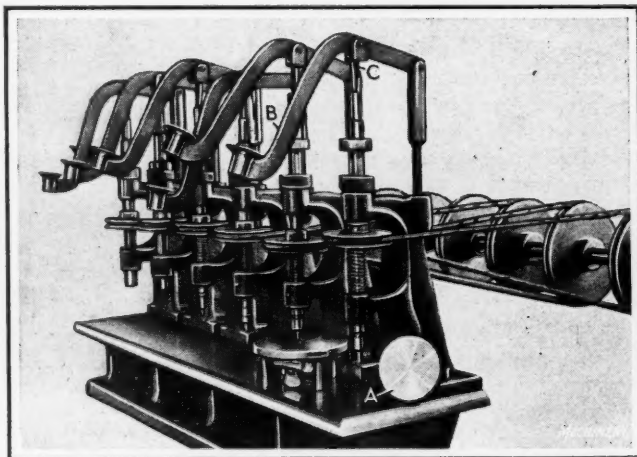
Bench Type Multiple Drilling Machine on which the Pillar Plates are drilled
